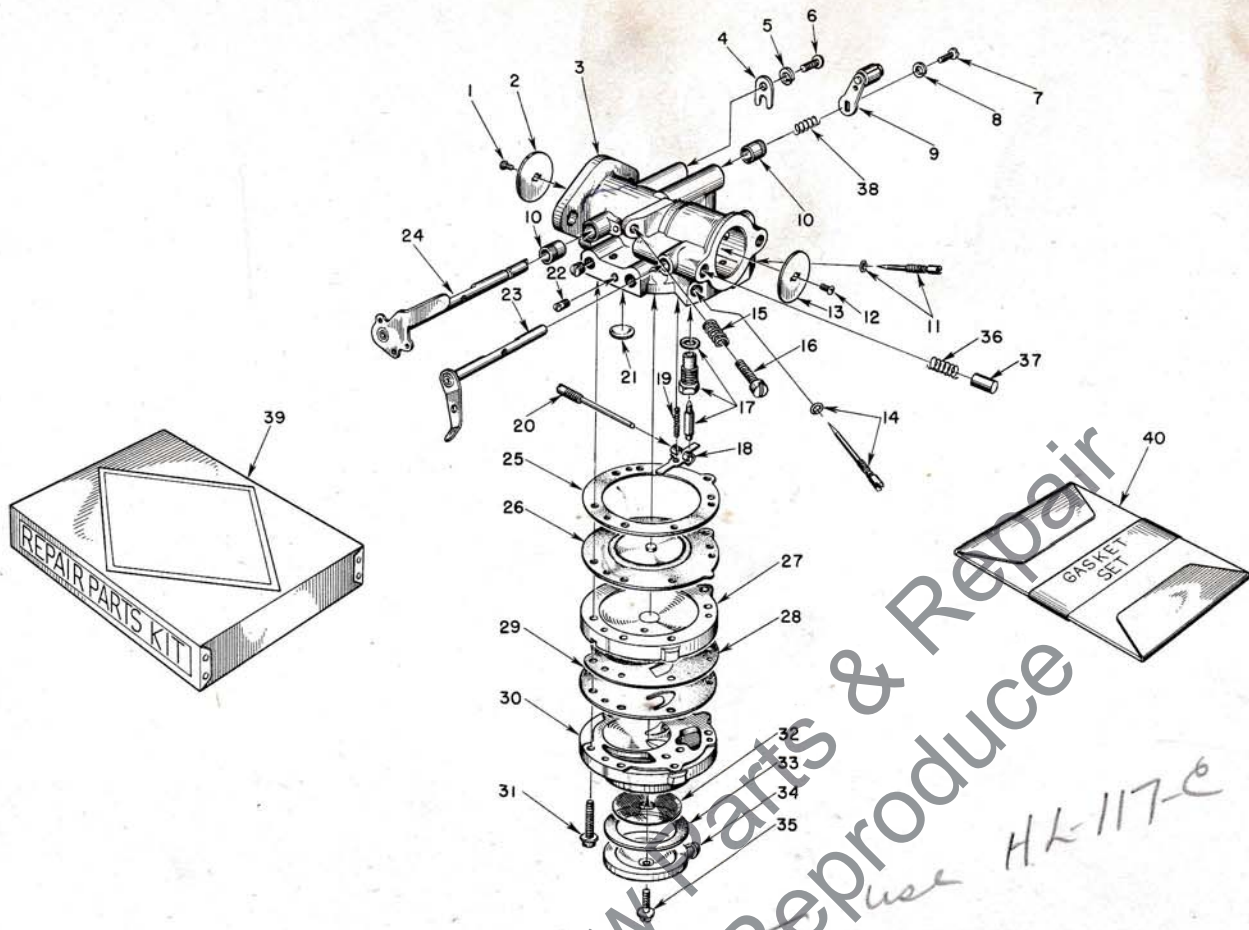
TILLOTSON HL-27B CARBURETOR PARTS
